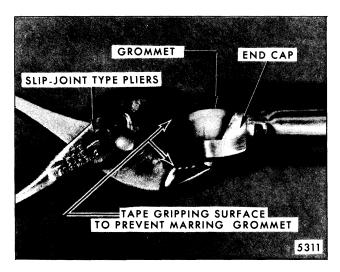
Counterbalance Support Assembly Grommet Replacement - "X-17" Style Only
